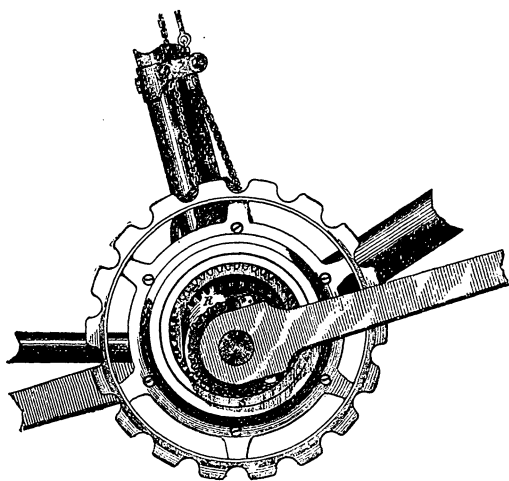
Front View of Pedal Shaft Attachment at Low Gear.
